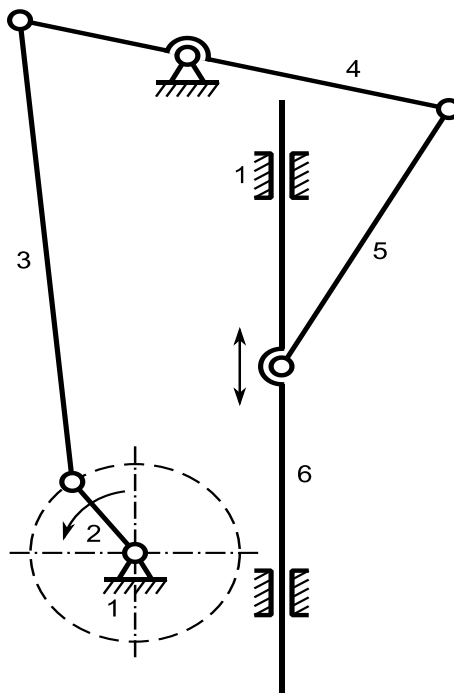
Multiple bar mechanism formed by crank mechanism and four-bar mechanism [7]
